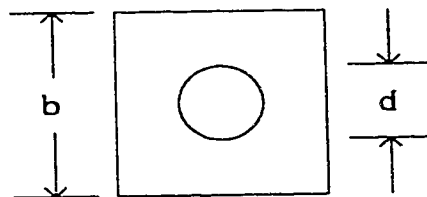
Cryogenic tuner mechanical drawing
